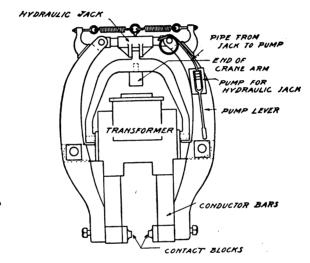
Diagram of Lorain Rail Welder Courtesy of Thomson Electric Welding Company
